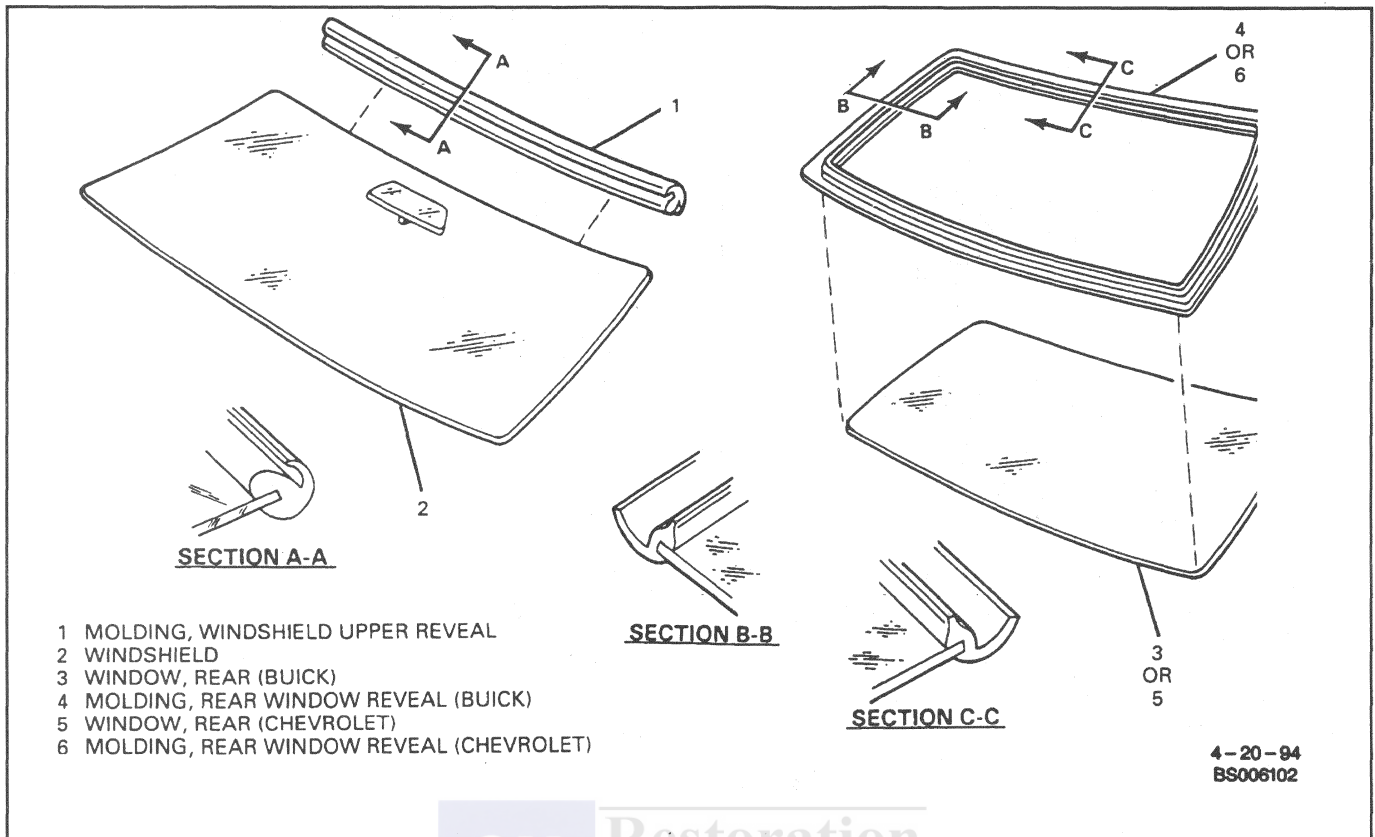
Windshield and Sedan Rear Window Reveal Molding
